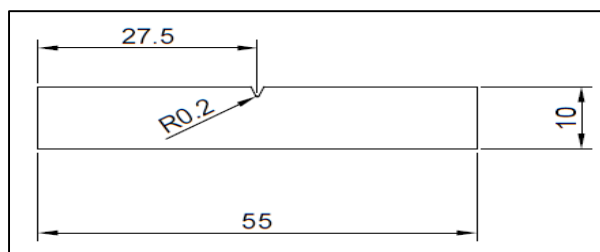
Standard Impact Test Specimen in mm (ASTM E23-04).
